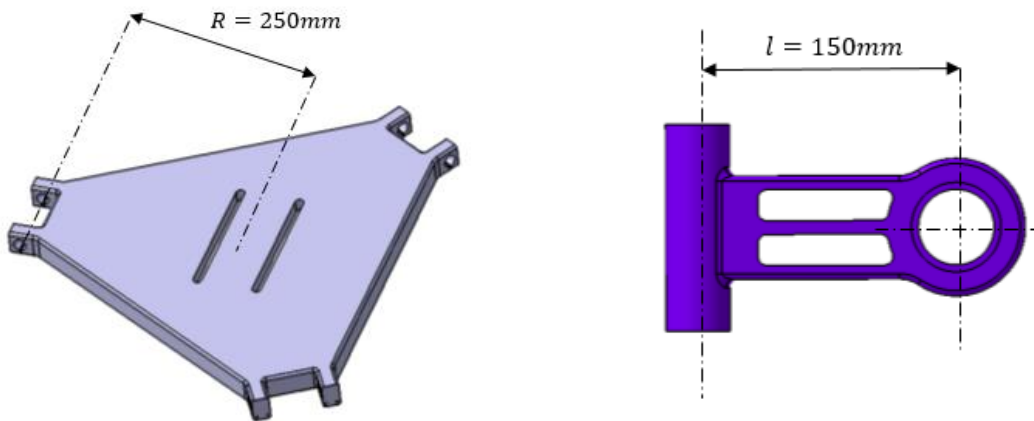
Basic dimensions of the surface (left) and the legs (right)
